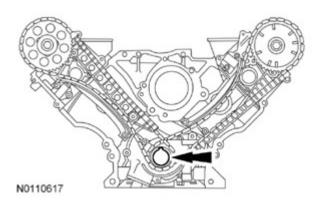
Locating Crankshaft With Keyway At 12 O'Clock Position Courtesy of FORD MOTOR CO.
